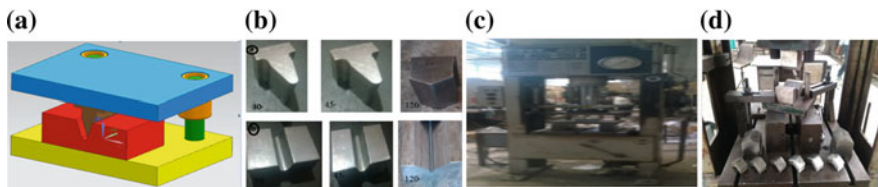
a CAD drawing. b Bending punch and die. c Hydraulic press. d Bent samples
